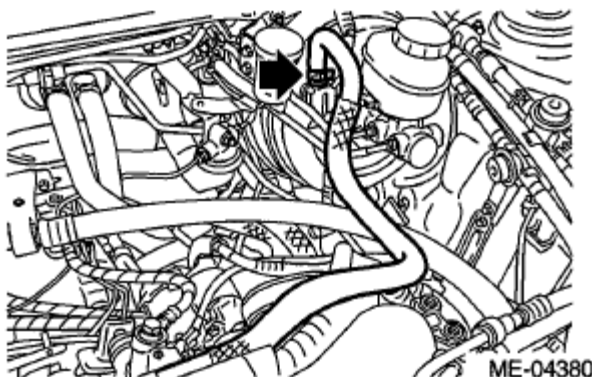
Locating Heater Inlet Hose And Heater Outlet Hose
